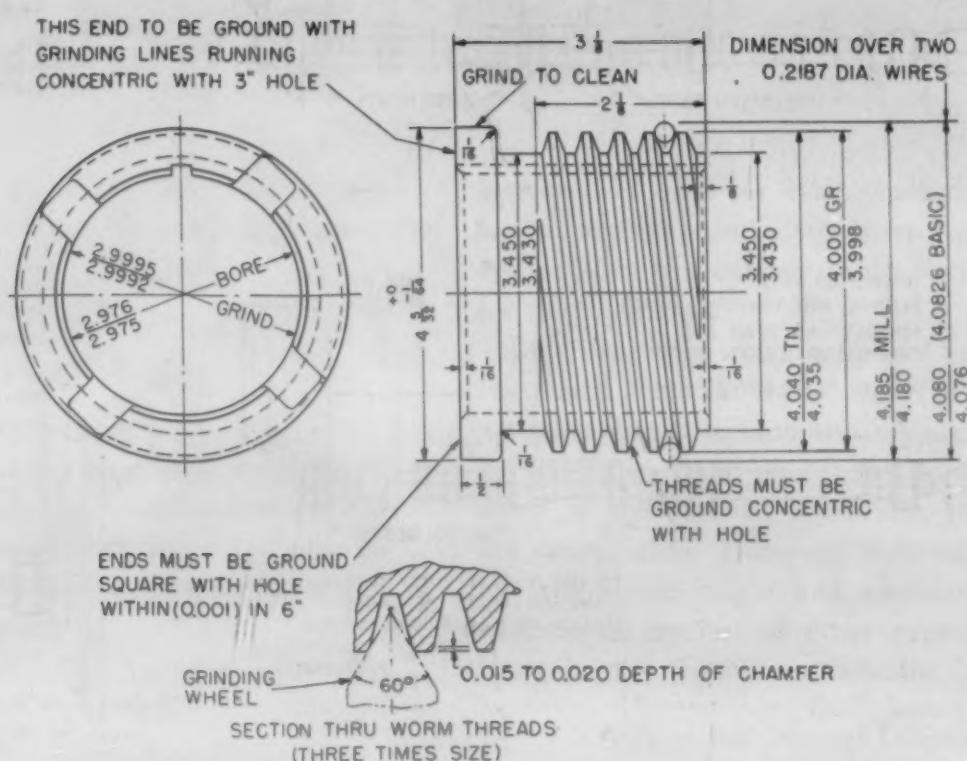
Worm sleeve of high tensile steel finished by grinding.
